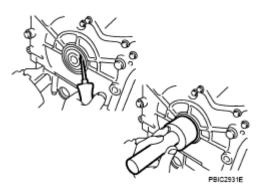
Removing Front Oil Seal Using Tool Courtesy of NISSAN MOTOR CO., U.S.A.
